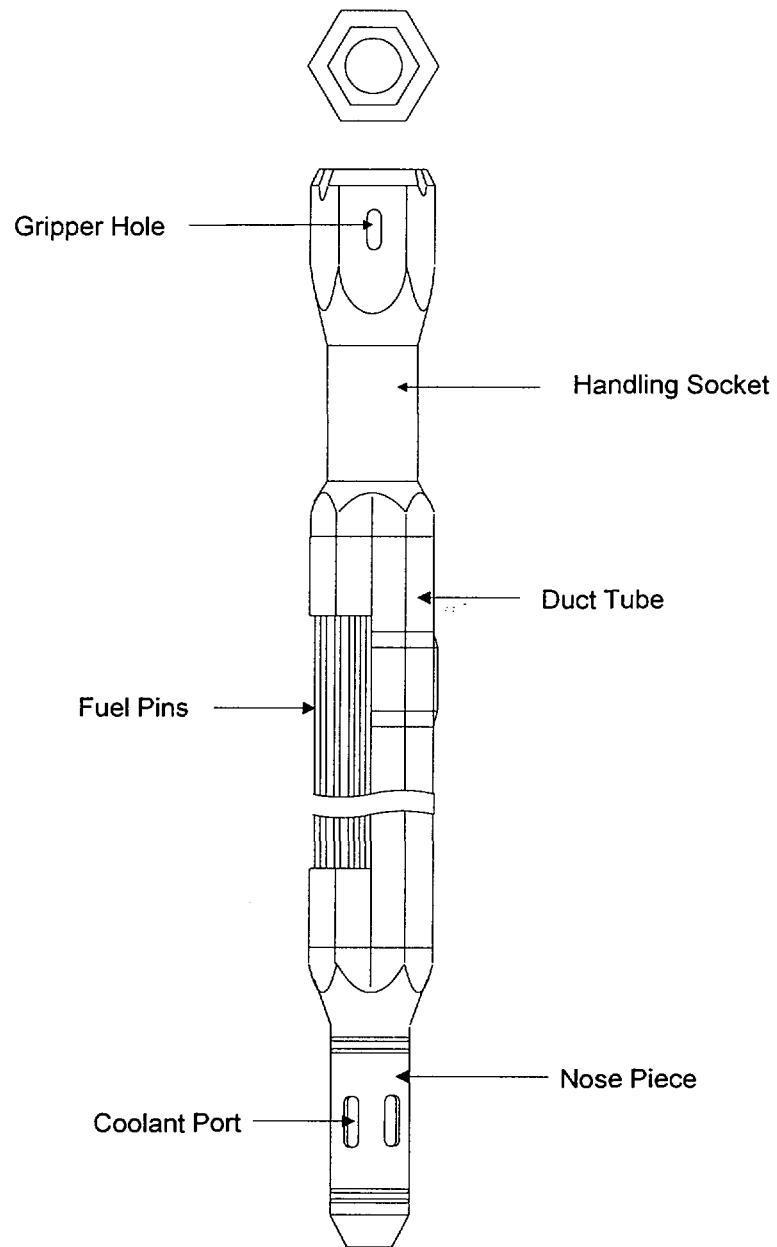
KALIMER Blanket Assembly Duct along with Key Section View.
